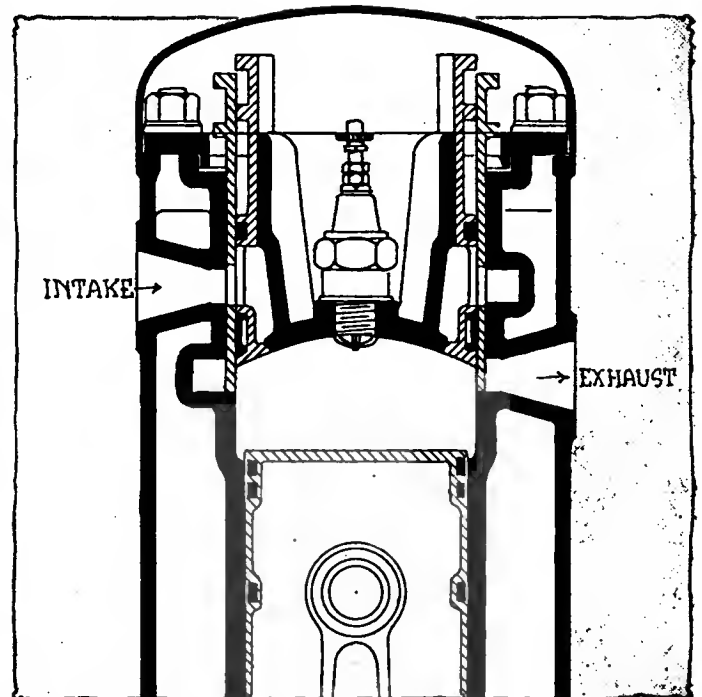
Overhead sleeve-valve design by Crossley Motors
